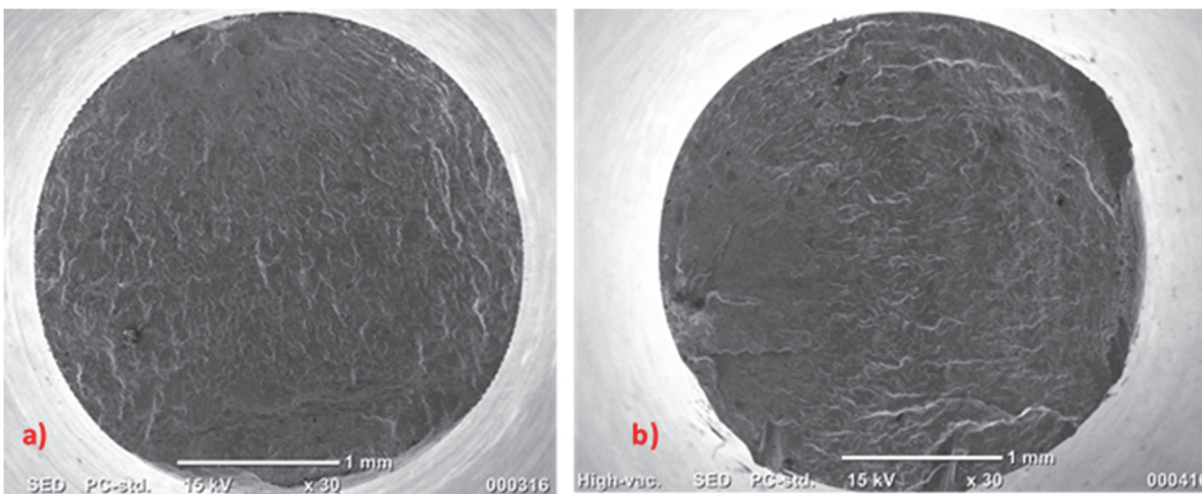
Fracture surfaces and crack initiation and propagation. a) 316 stainless steel specimen immersed in water, b) 304 stainless steel specimen immersed in antifreeze.
